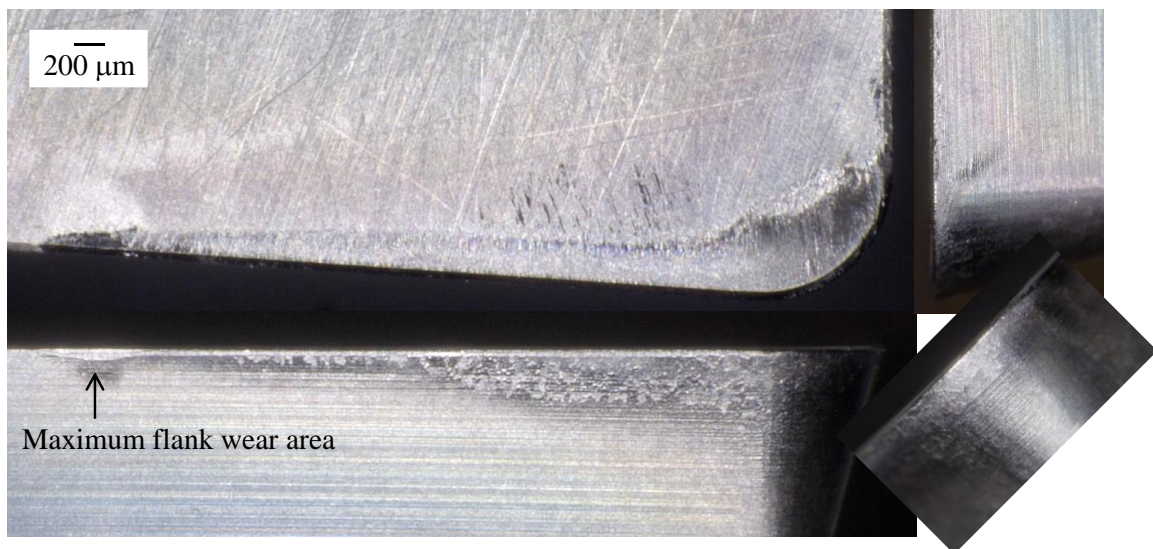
Each face of the insert in tool axis offset 0 mm after tool life experiment.
